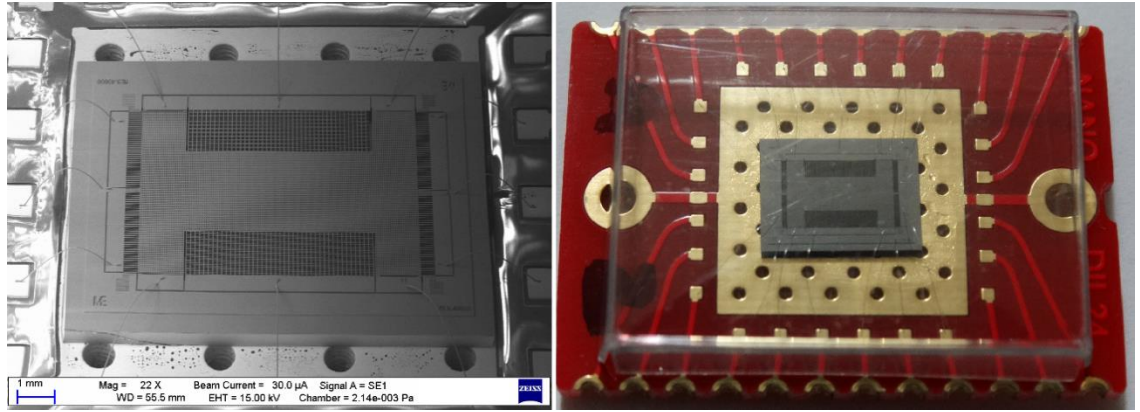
(Left) SEM image of the capacitive MEMS accelerometer fixed on a PCB carrier with a crystal-bond and wire-bonded to the PCB pads and (right) photo of the sensor with the transparent cap.
